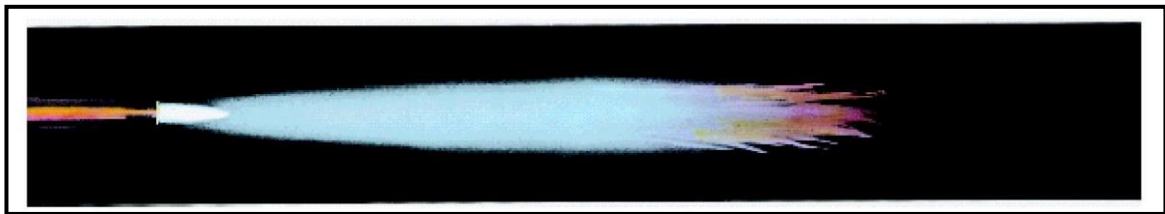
Oxyfuel gas welding flame used for gas welding as well as for Brazing.
